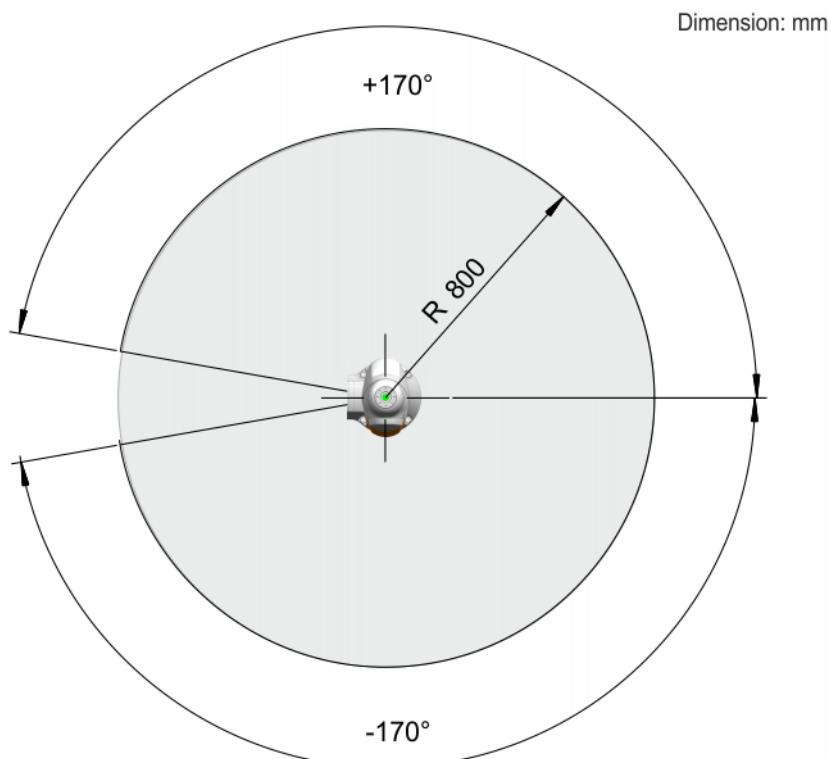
LBR iiwa 7 R800 working envelope, top view
